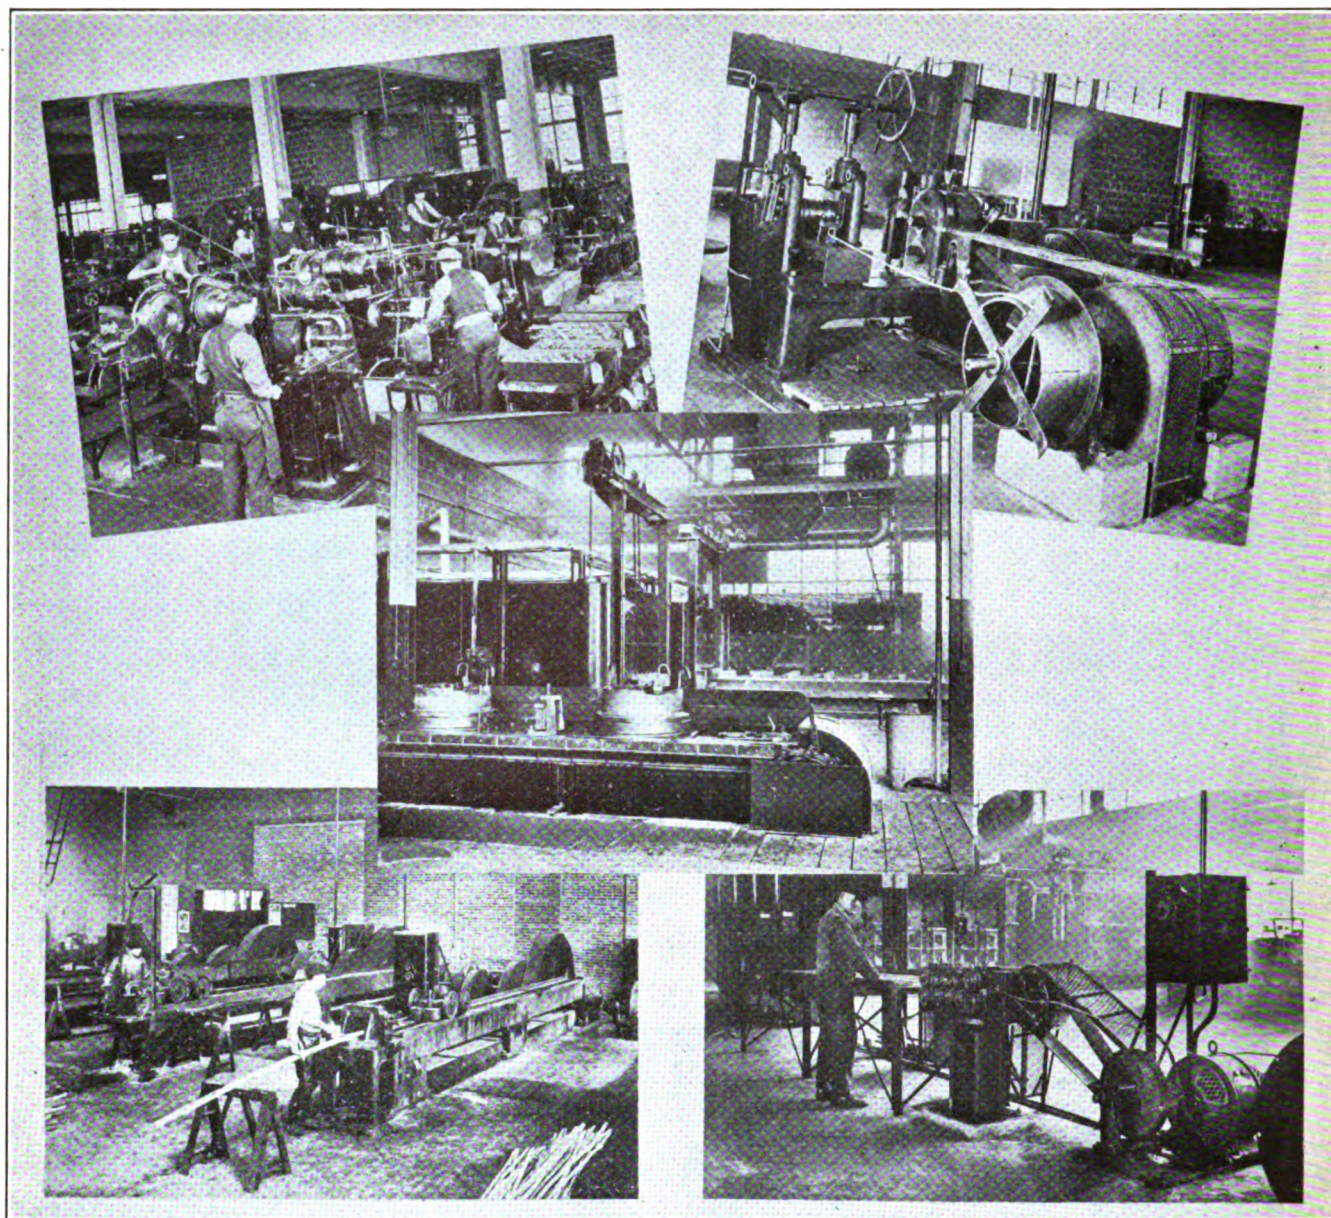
(Upper left) Machine operations. (Upper right) Small rolling mill and reel. (Center) Draw-bench—reel type. (Lower left) Large draw bench. (Lower right) Straightening rolls for drawn stock.
